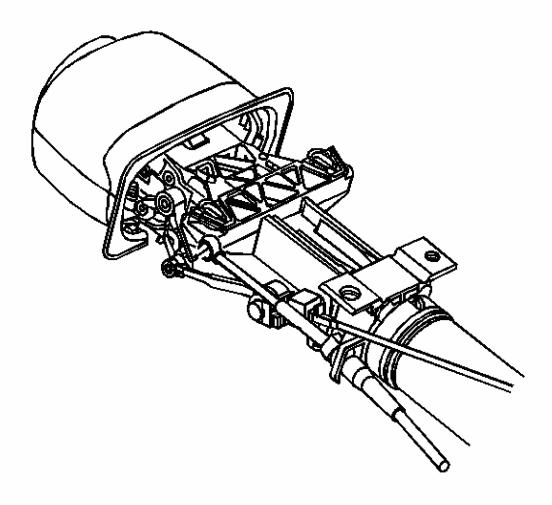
View of Shift Lever Cable and Linear Shift Assembly Courtesy of GENERAL MOTORS CORP.
